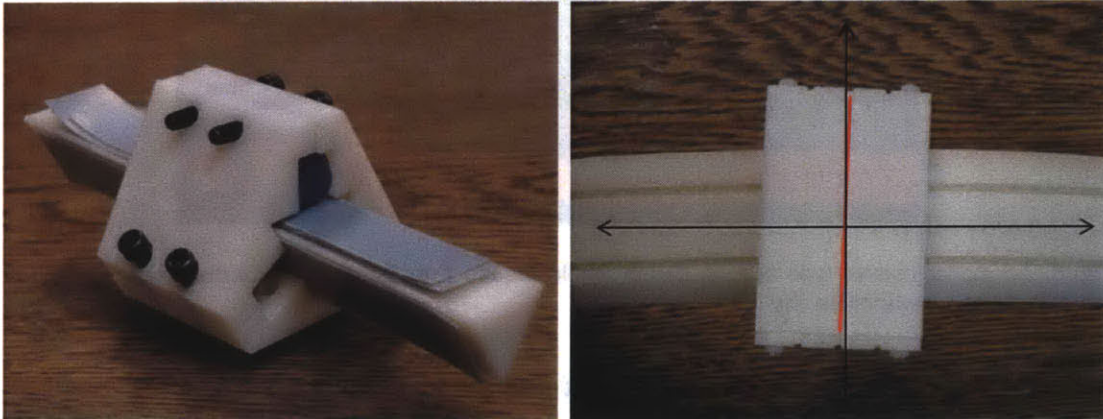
Bench level prototype of roller bearing riding on triangular prism. Left: A model of the three-roller bearing design was made, with a straight triangular prism substituting for the hoop. Right: A model of the bearing was made to fit on a curved triangular prism. Even though the bearing is kinematically constrained, the bearing tends to pivot to the side.
